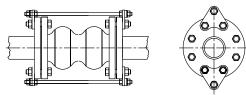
Typical piping layout showing the use of Control Rods with Expansion Joints, when proper system anchoring is limited.
